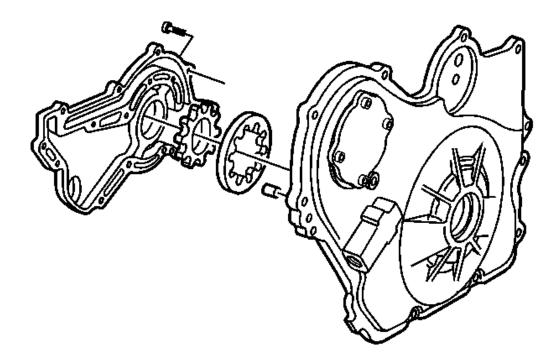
Exploded View Of Oil Pump Assembly Courtesy of GENERAL MOTORS CORP.
